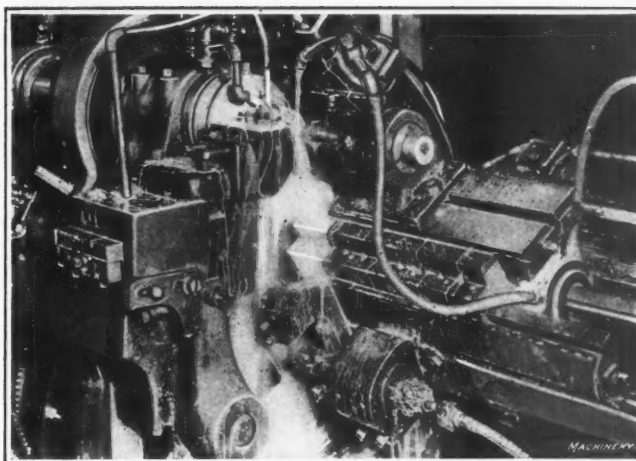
Application of Lubricant to Tools on Automatic Screw Machine
